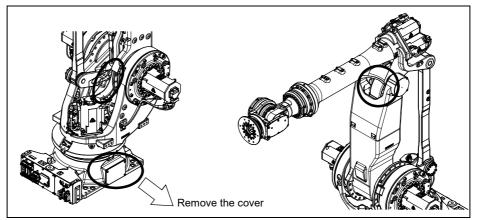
(a) Inspection points of the mechanical unit cables
